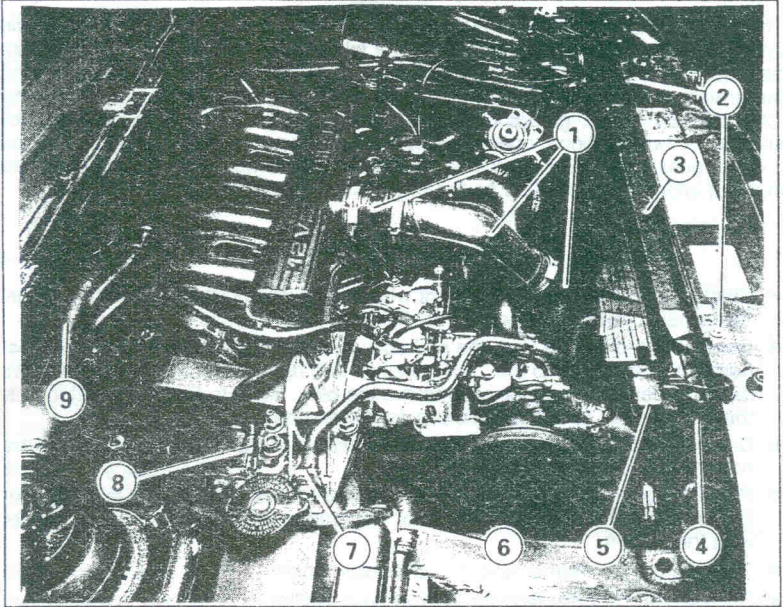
Details for the removal of the engine. The numbers are referred to in the text.
